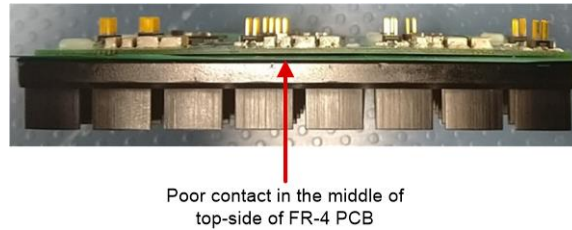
FR-4 PCB Poor Contact With Phase Change TIM
